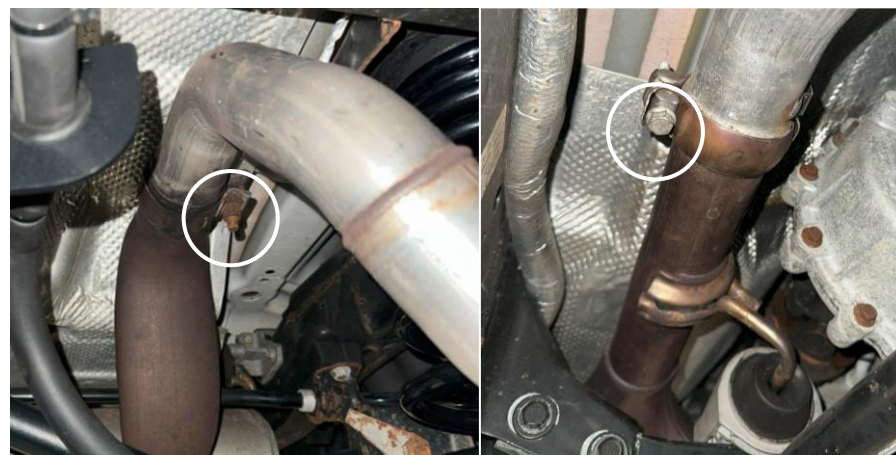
Rear exhaust section clamps to be removed (3.6 V6 JL)
